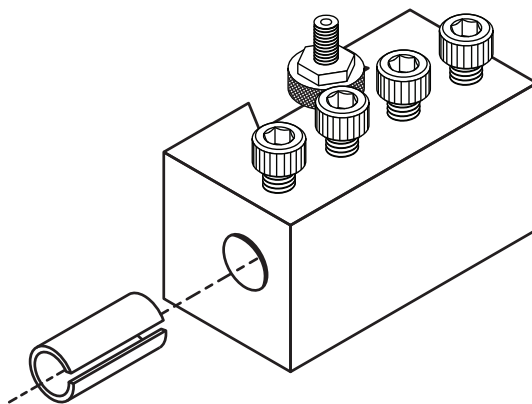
P/N 2285 Quick-Change 3/8" Boring Tool Holder shown for reference
